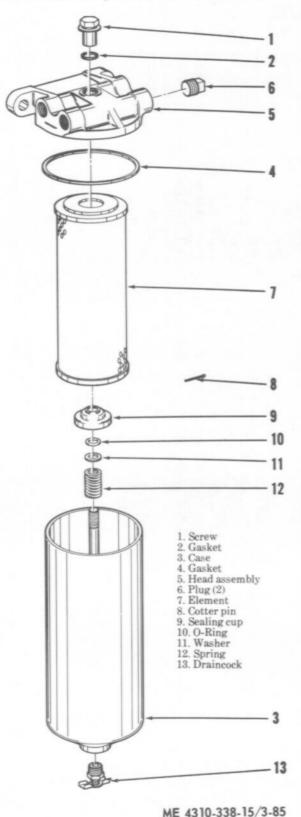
Final fuel filter assembly; disassembly and reassembly.
